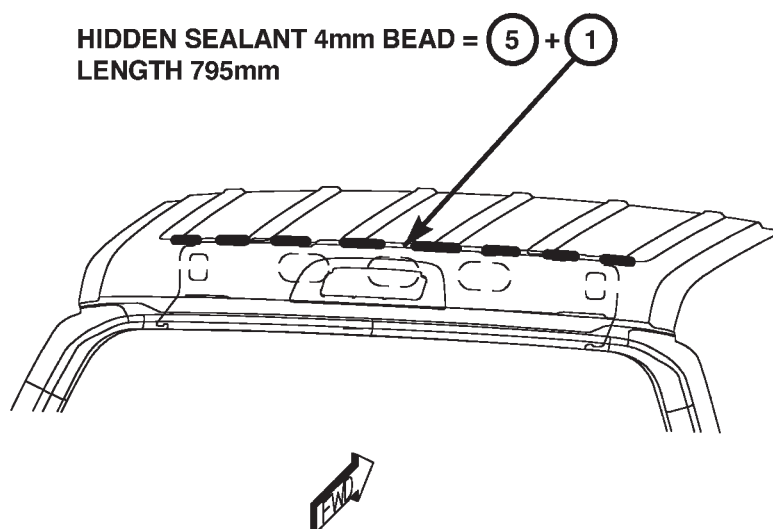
ROOF PANEL/REAR ROOF HEADER
